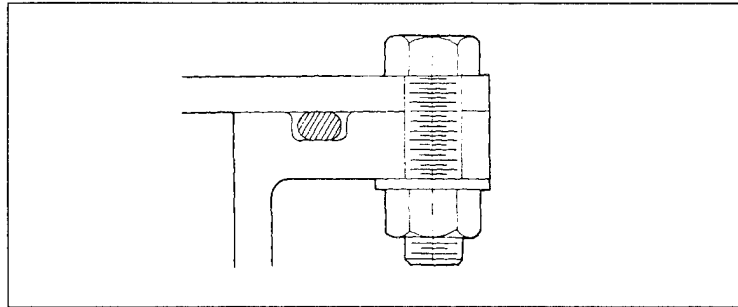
EMI Gasket Groove Placement [Ref. 10]
